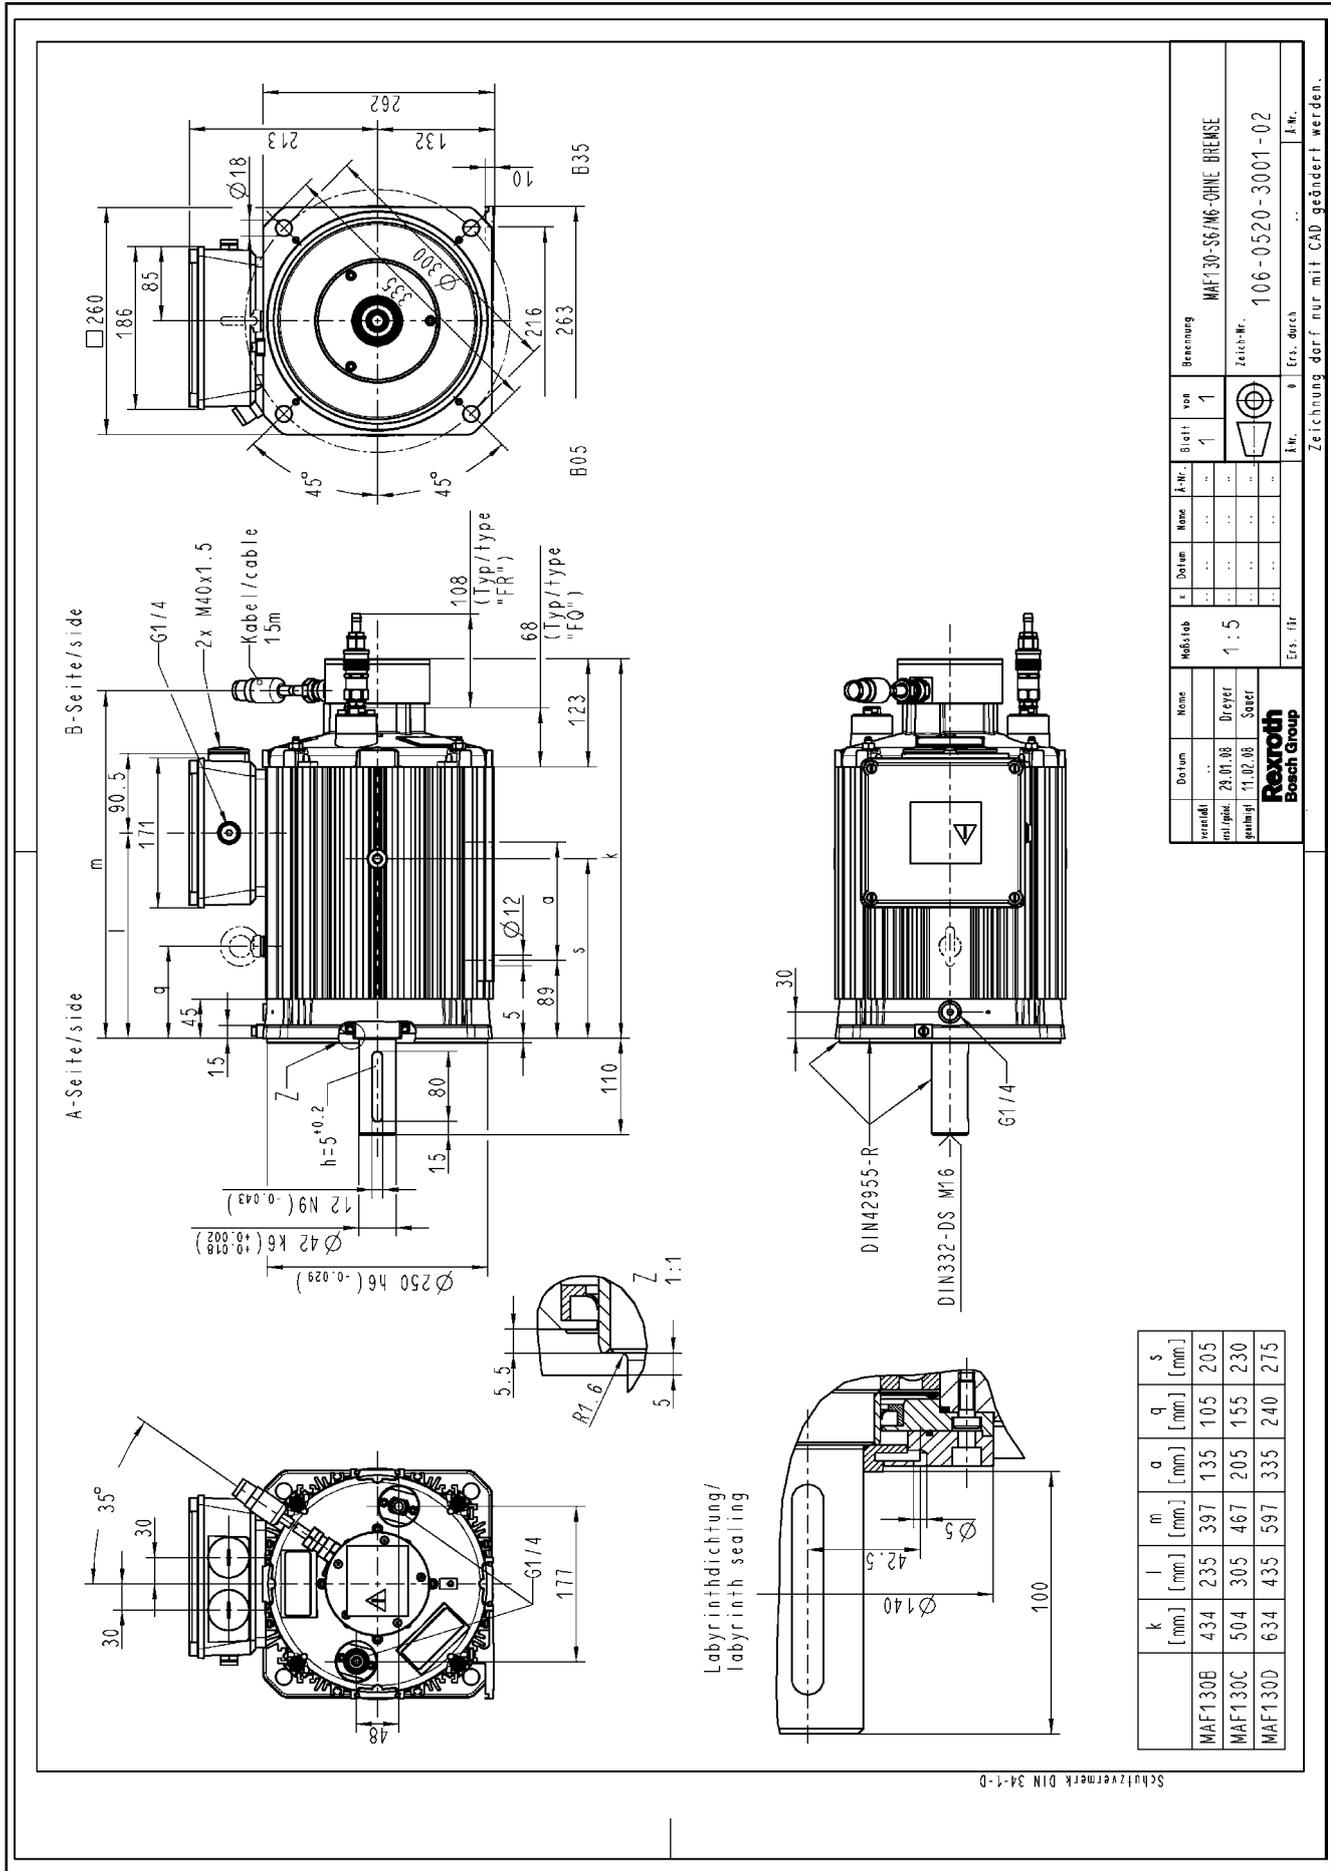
Dimension sheet MAF130 with encoder M6 or S6, without brake
